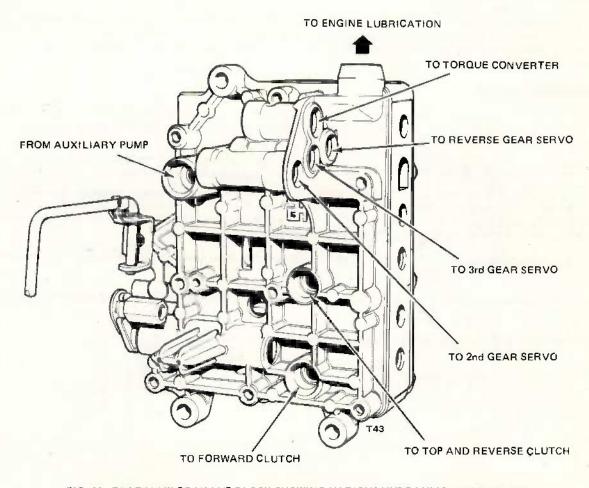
REAR VIEW OF VALVE BLOCK SHOWING VARIOUS HYDRAULIC CONNECTIONS
